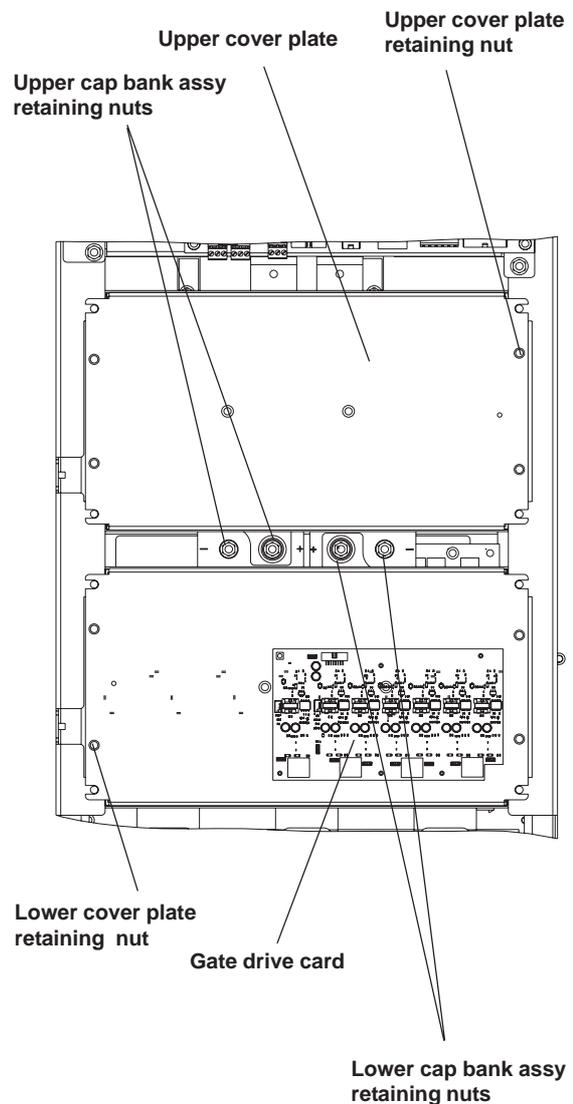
Upper and Lower Capacitor Bank Assemblies
